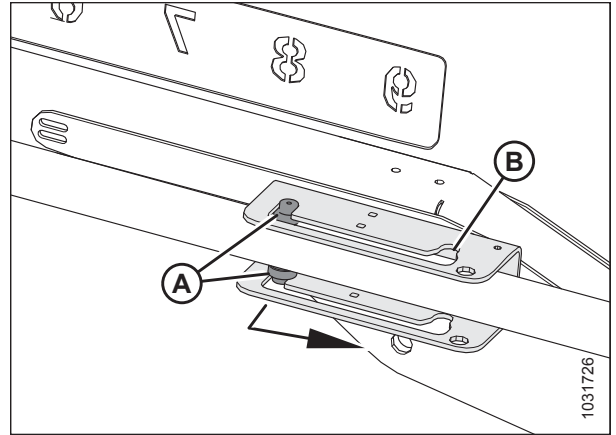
Outer Left Arm Cylinder – Forward Position
